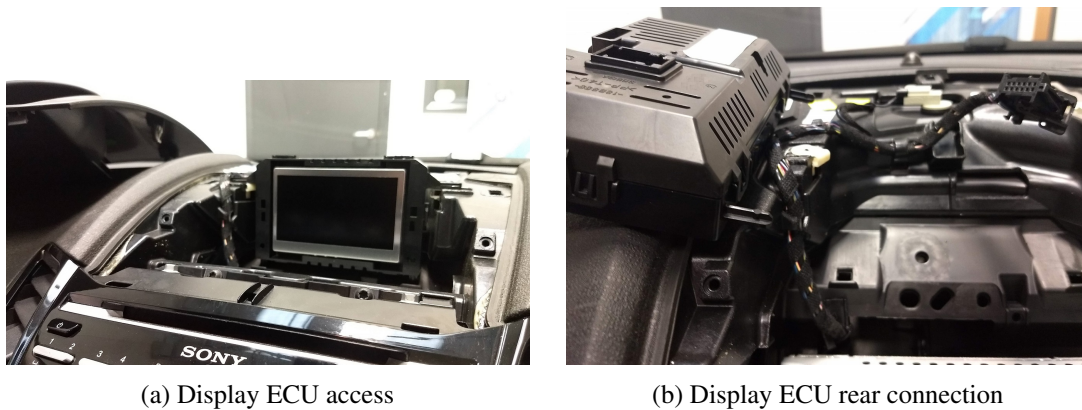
Using a trim removal tool the cover of the display ECU is removed, two Torx screws hold the component in place, once removed the ECU plug is accessible
